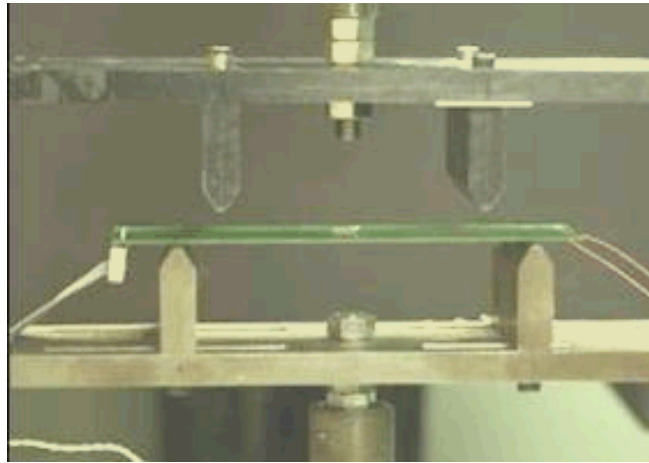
Four-point bend test fixture on servo-hydraulic mechanical tester.
